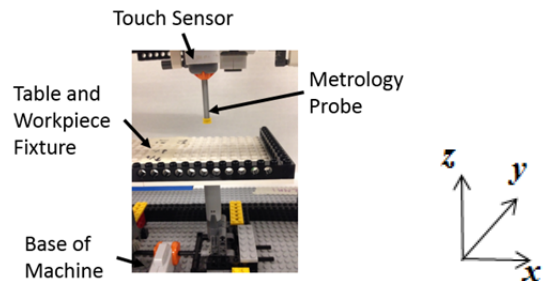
Metrology head modification to Lego™ 3-axis machine tool
